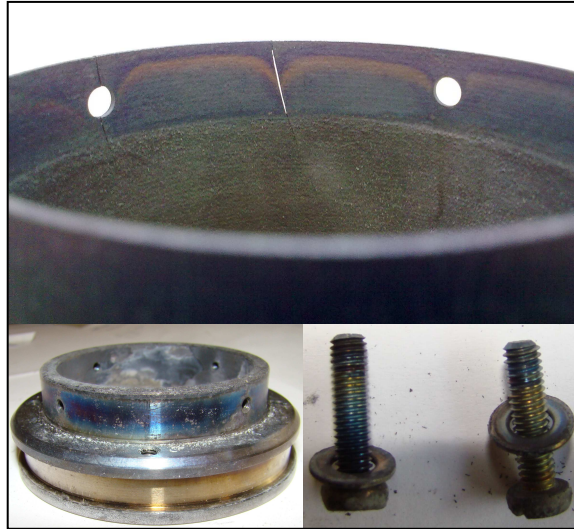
Overheating based discolorations and crack formations of the tungsten cylinder and its attachments
